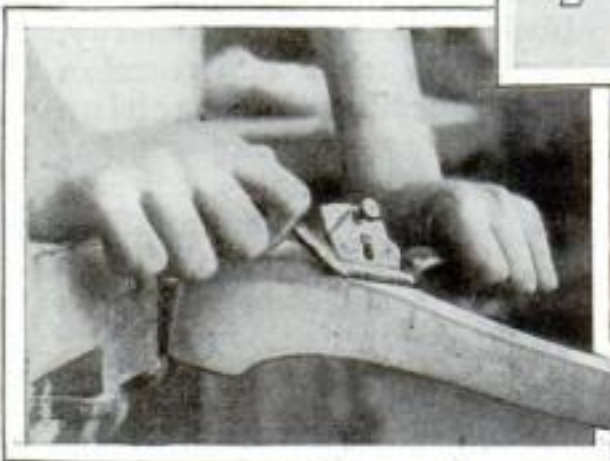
Shaping the cabriole leg after it has been roughly cut to shape on a band saw.
